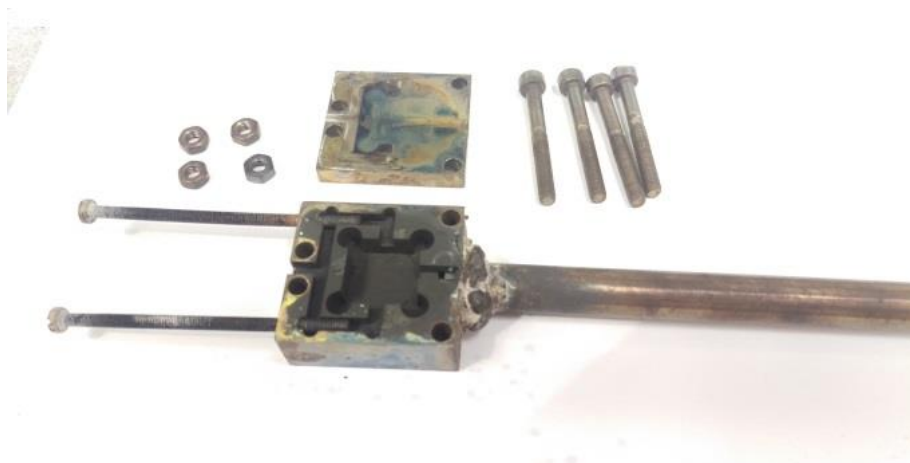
Stainless steel Argon flow jig. Contact resistance samples and 7-couple modules can be brazed in this assembly.
